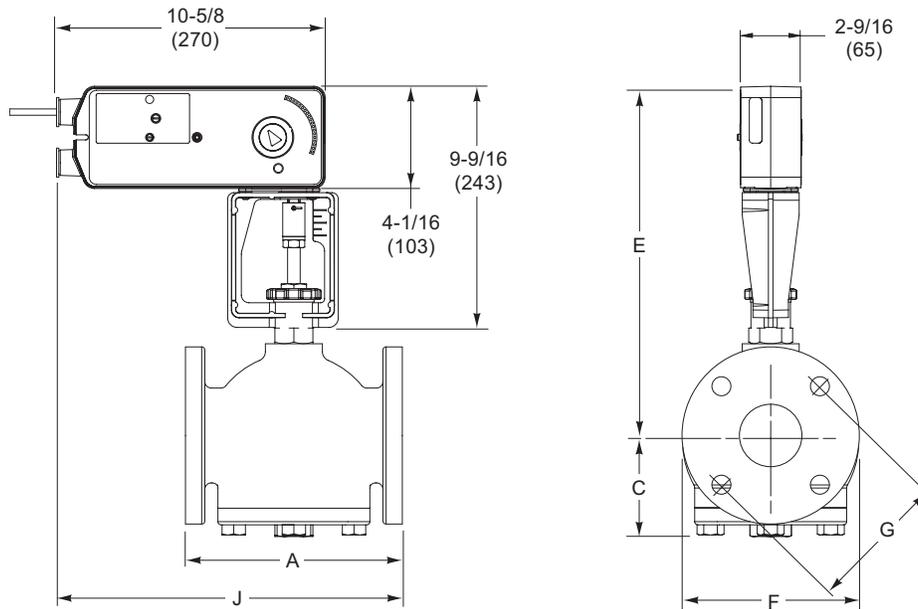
Mx61-720x with 2-1/2" to 4" N.C. 2-Way Flanged Globe Valve.
